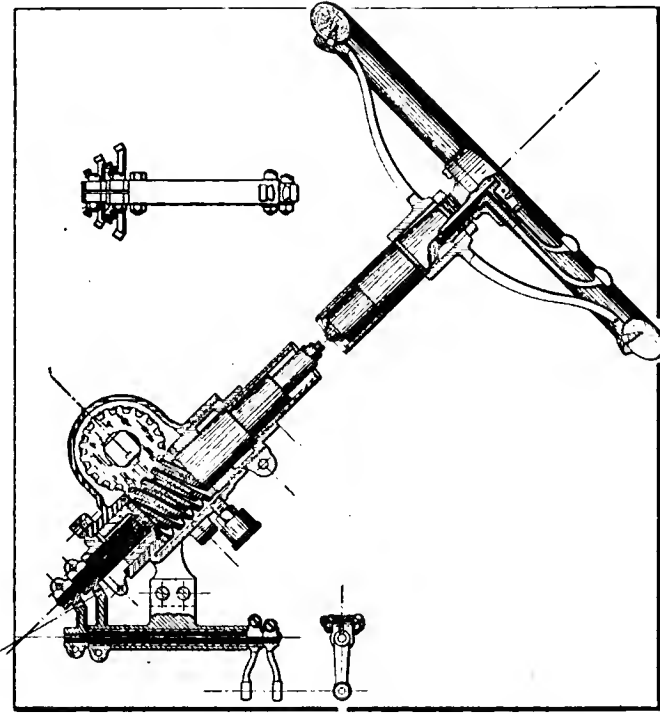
A low-priced form of worm and sector gear with plain thrust bearings, but with means for adjusting
